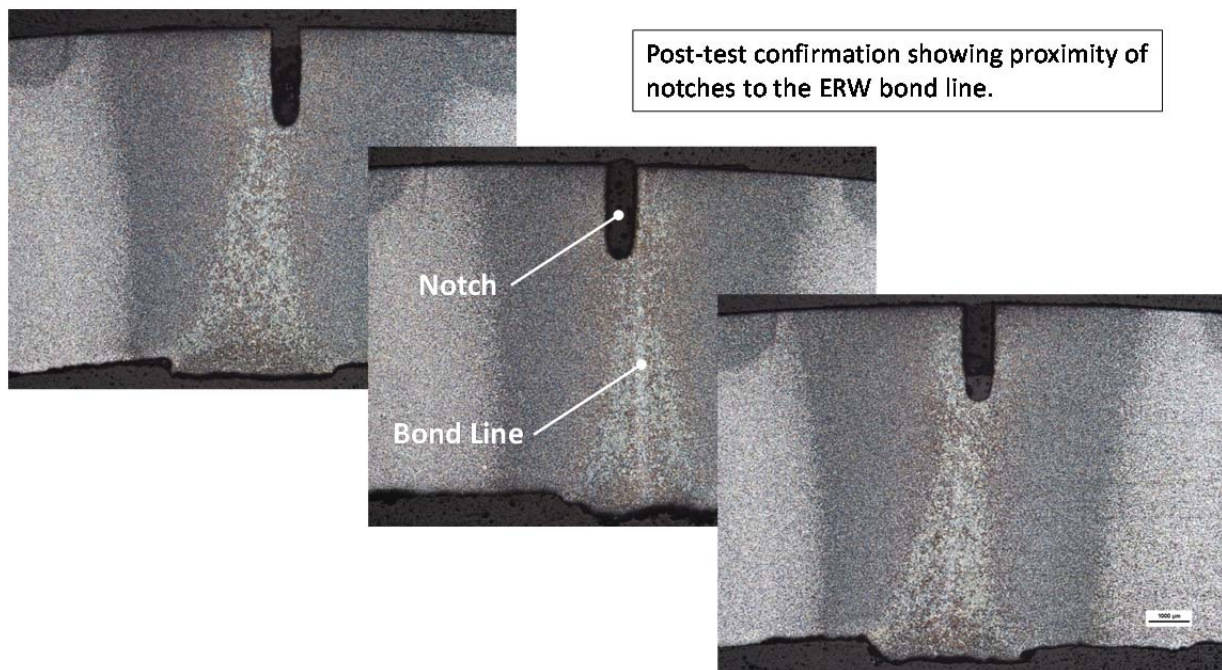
Sections of EDM Notches through LF-ERW Bond Lines of 16-inch pipe
